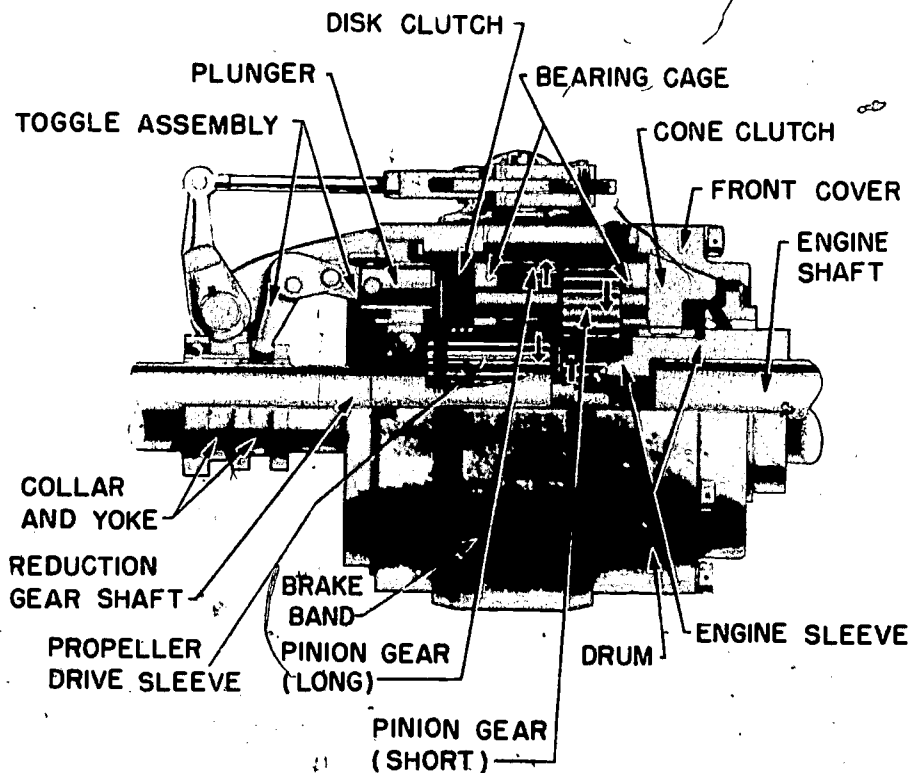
Cutaway view of Joe's clutch and reverse gear.
